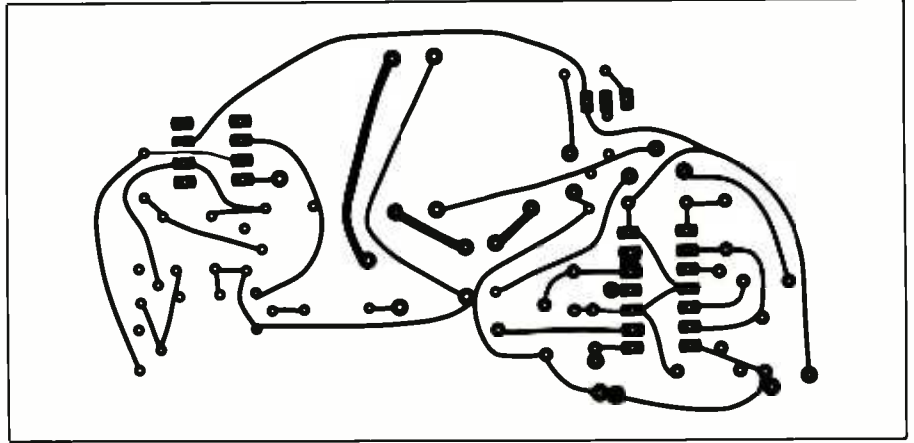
Actual-size etching-and-drilling guide for project's printed-circuit board.
